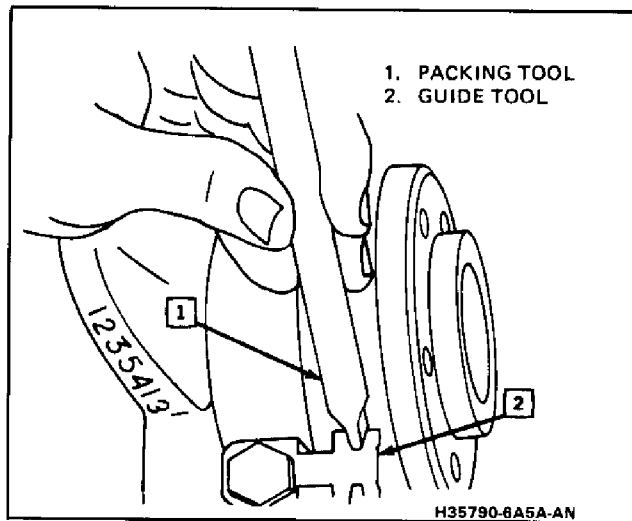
Packing Short Pieces of Rope Seal into Guide Tool & Cylinder Block
